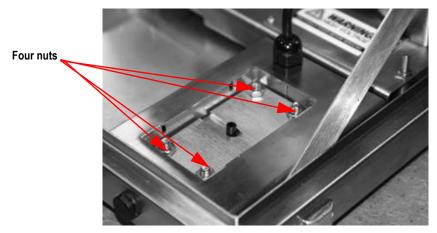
Communications Cable Assembly in the Printer Enclosure
